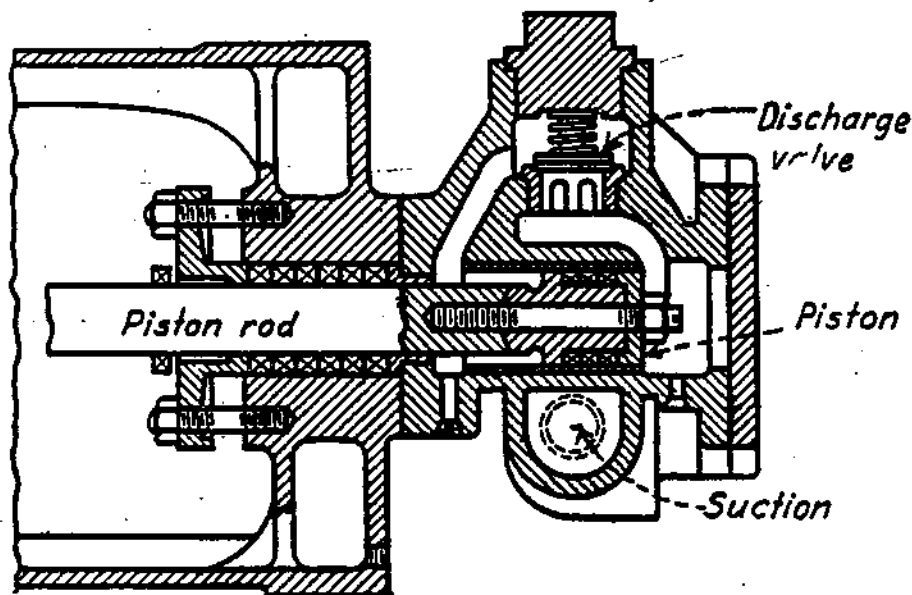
Section through differential piston pump showing the single discharge valve. A single suction valve is located on the side of the cylinder between the suction manifold and the space below the discharge valve.
